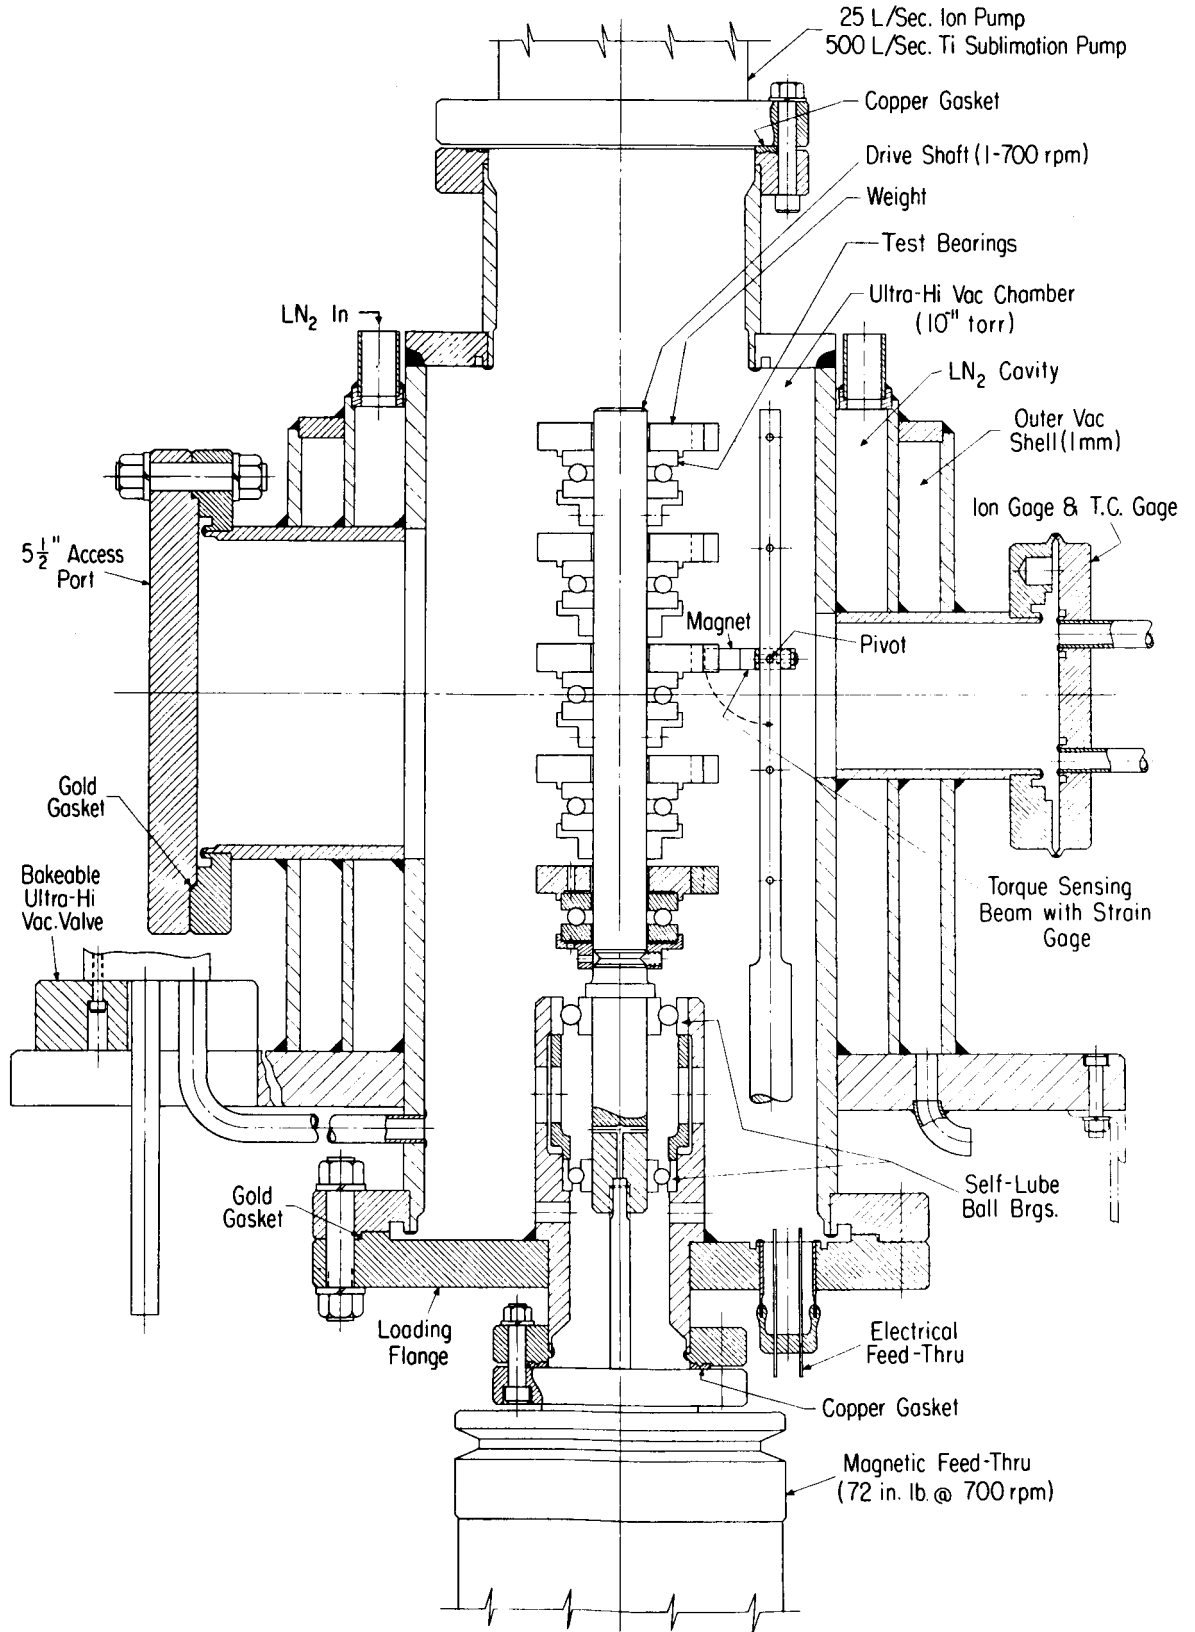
Vacuum Chamber Detail for Rolling Tests
